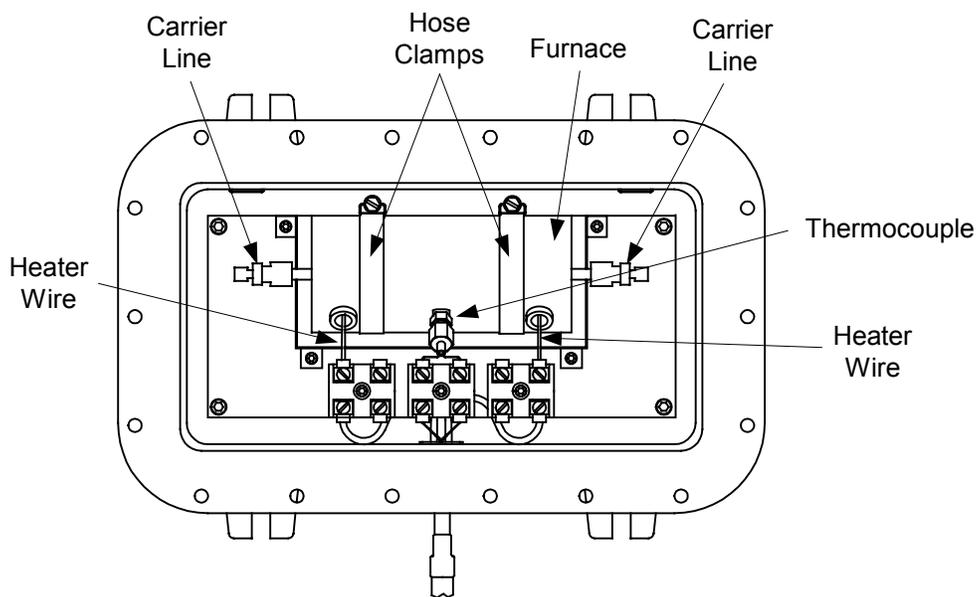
FURNACE HOUSING WITH COVER REMOVED
